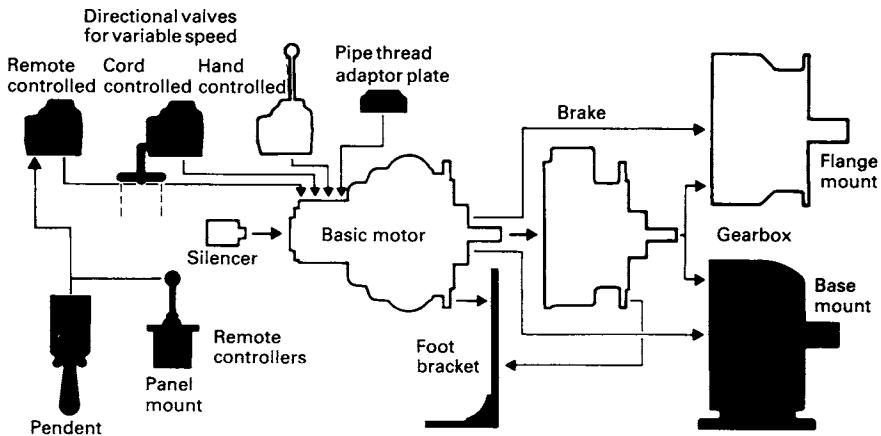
Air motor with a variety of options. Example shows a motor with hand controller valve, gear box, brake and silencer.
